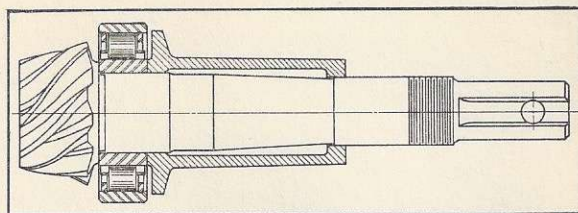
Pinion Shaft with Bearing Inner Race and Spacer Used on 46-9 and 43-9 Ratio Differentials
